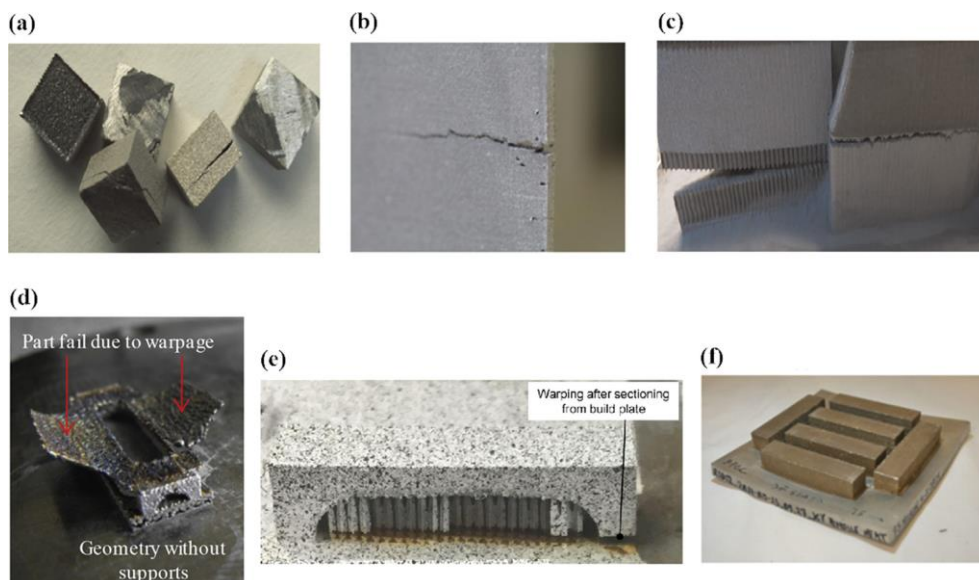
Cracks and distortion in AM-parts [10]: (a) cracking in Inconel-718 alloy components; (b) cracking in Ti-6Al-4V alloy parts; (c) cracking in the support-part interface; (d) warpage of a cantilever structure; (e) warping of the bridge structure detached from the substrate; and (f) warping test on the printed parts.
